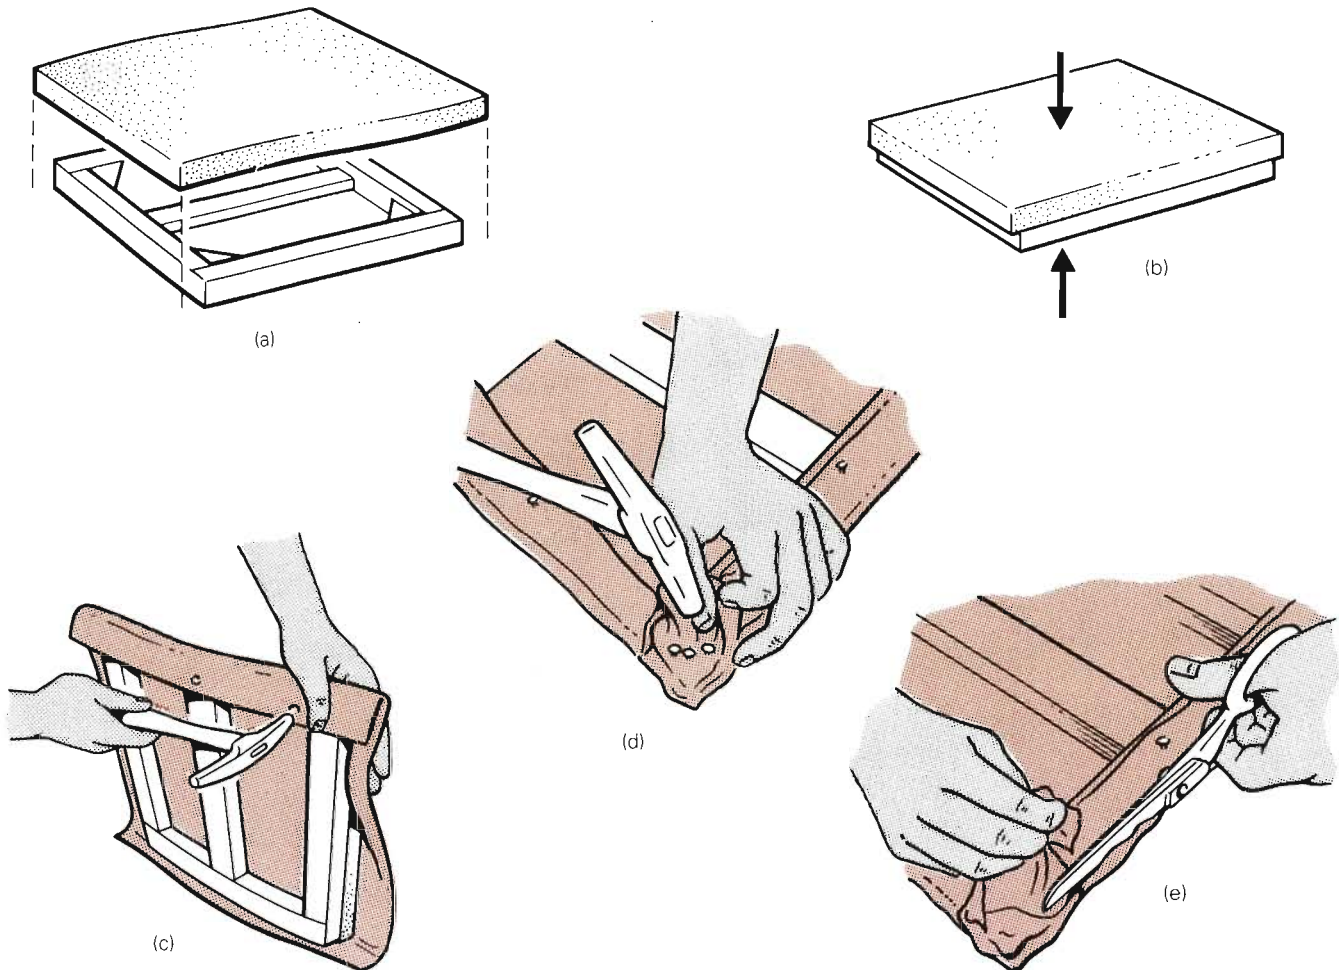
Upholstering a loose seat: (a) cut the foam, (b) fix the foam to the base, (c) tack front fabric first, (d) work round a corner, (e) trim excess material.
